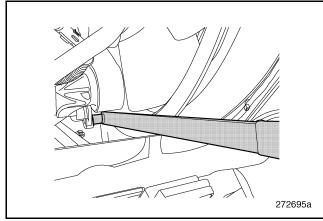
Fan and Coolant Pump Drive Belt Installation
